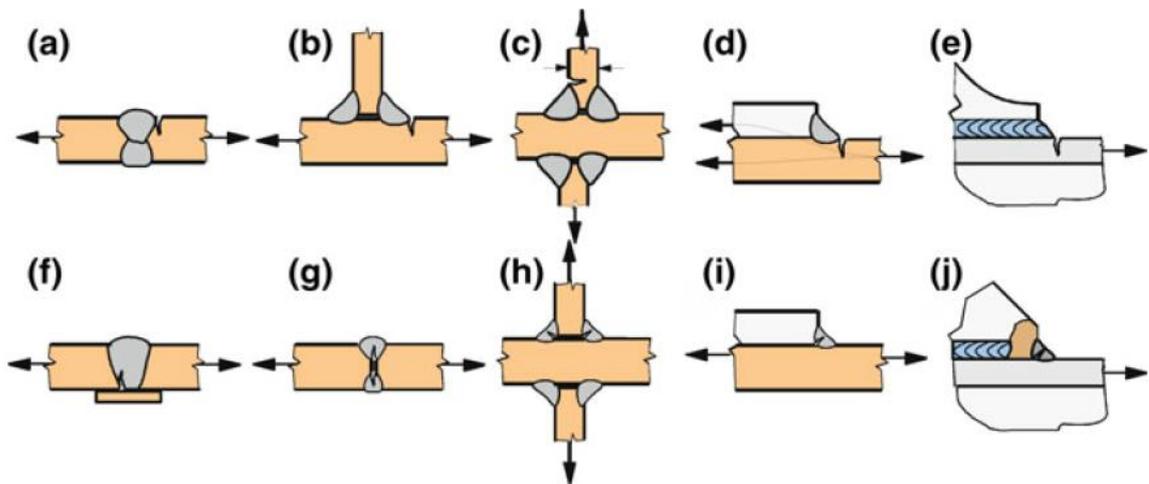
Possible fatigue crack initiation locations in welded joints (Niemi, et al., 2018, p. 6).
